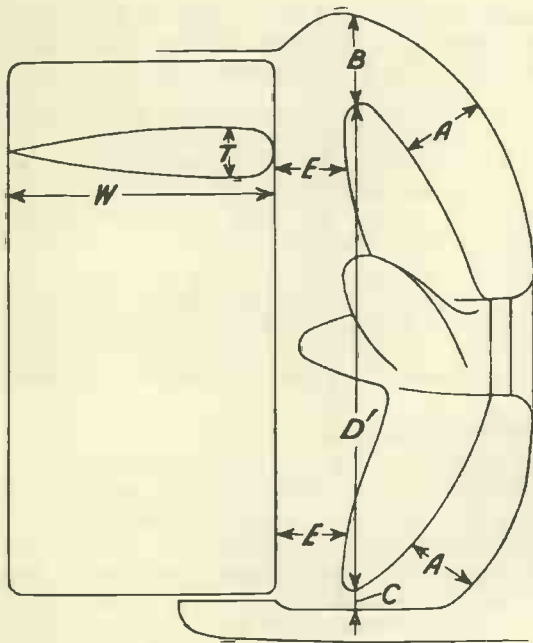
SINGLE SCREW APERTURE CLEARANCES
